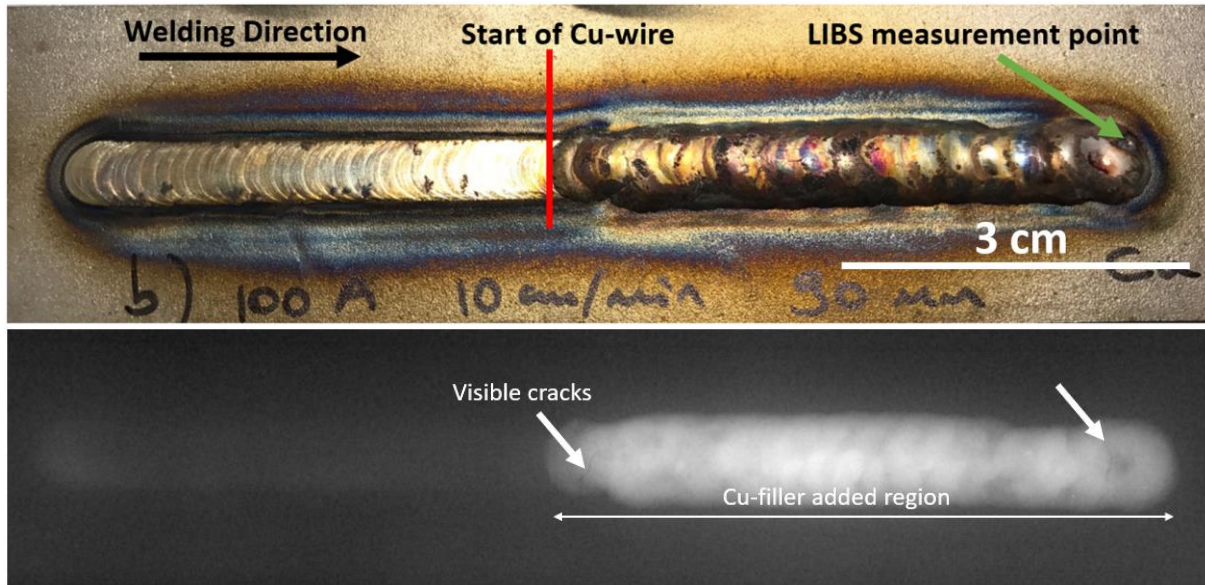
Top view of the completed weld bead (b) with Cu wire addition at 45mm. The radiograph of the completed weld is shown below the weld picture.
